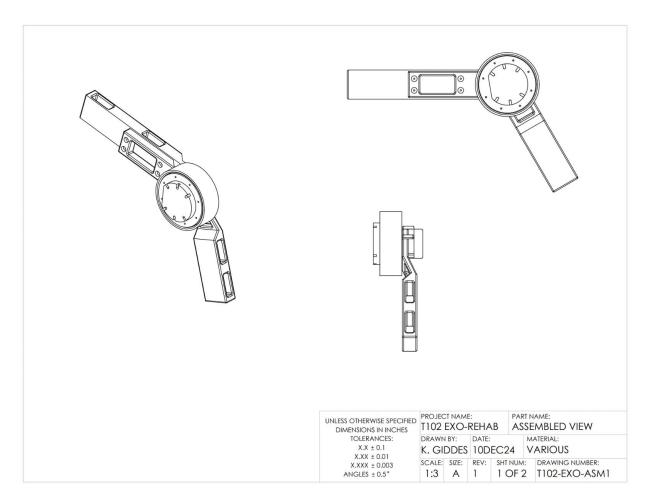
Technical drawing of the current prototype. Made with SolidWorks.
